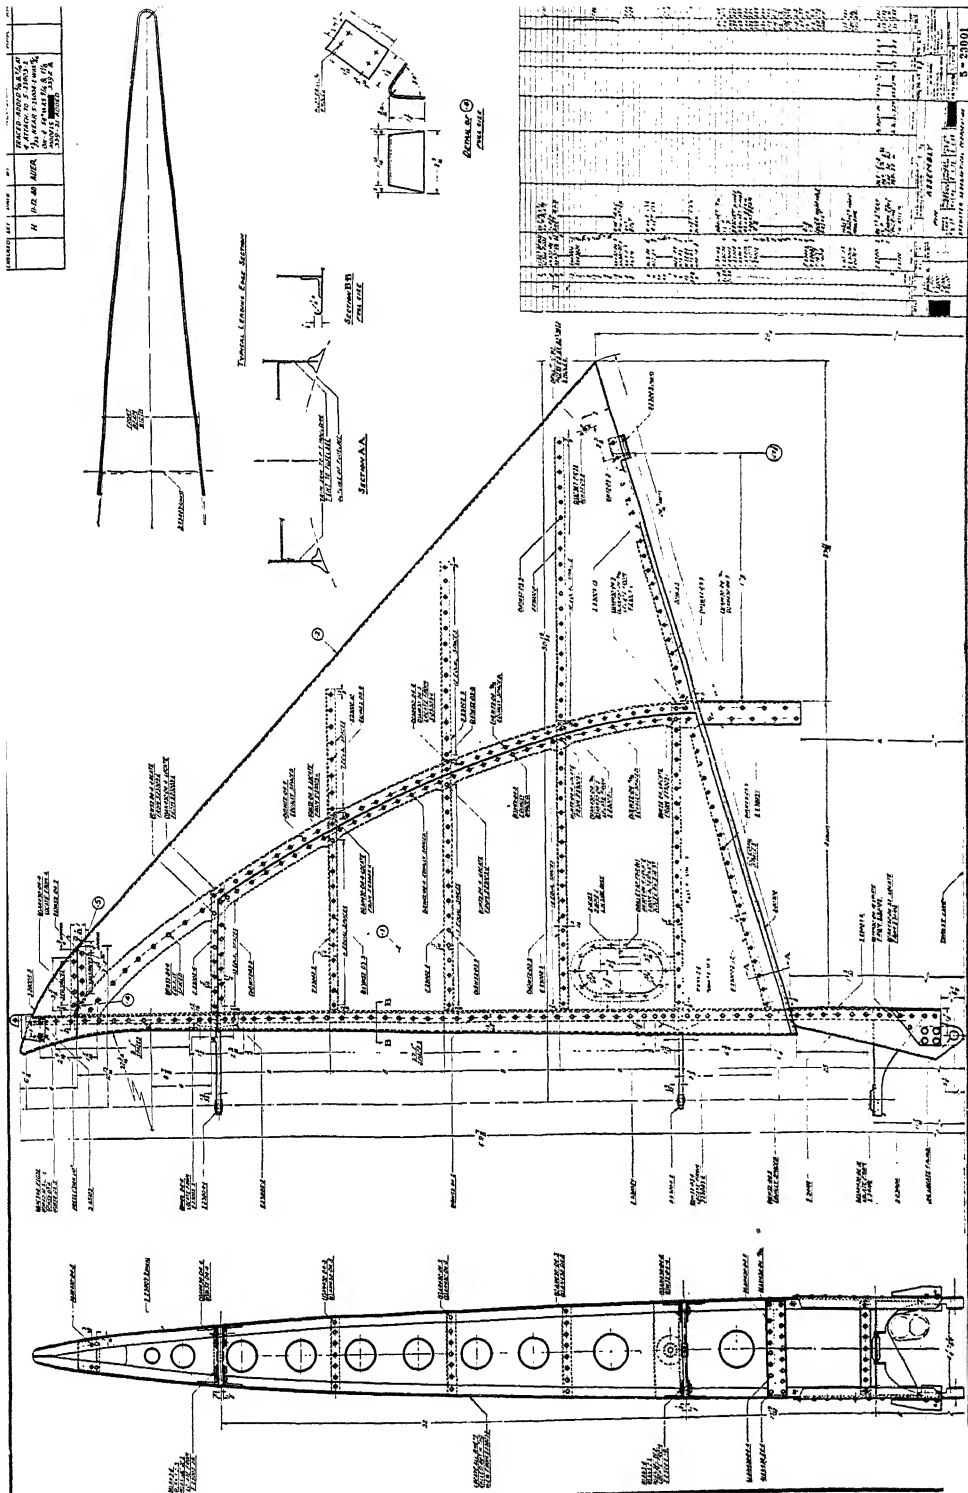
Fin Assembly. (Brewster Aeronautical Corporation.)
